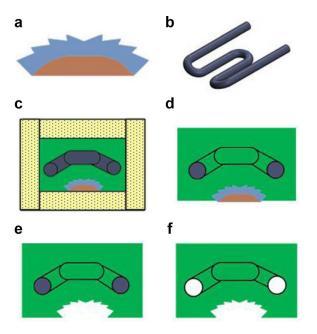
Fabricating procedures of an epoxy CC mold by epoxy casting: (a) preparing the master model (pattern of the molded part), (b) preparing the pattern of CC channels, (c) pouring Al-filled epoxy resins, (d) curing the mold and removing the frame, (e) removing master model, and (f) removing cooling channels (Adapted by permission from [142], Copyright 2016 Springer-Verlag London).
